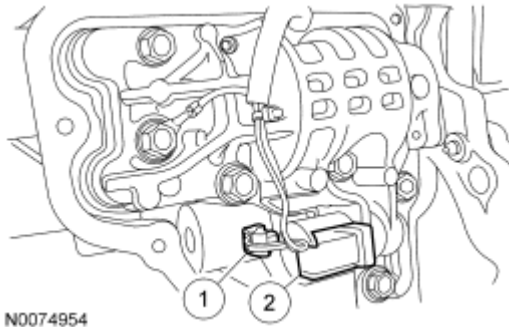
Identifying Electrical Connector For Pressure Control Solenoid B (PCB) & Shift Solenoid F (SSF)
